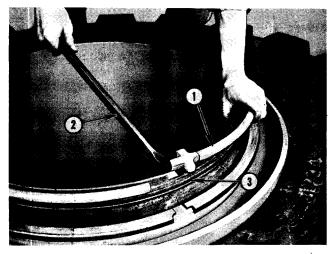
REMOVING LOCK RING 1. Lock Ring 3. "O" Ring 2. Tire Tool
